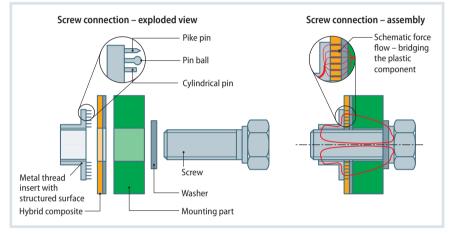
Pins as a surface structure on metal thread inserts penetrate the tape layer and prevent settling effects of the screw connection Source: IK, IWF, graphic: © Hanser
